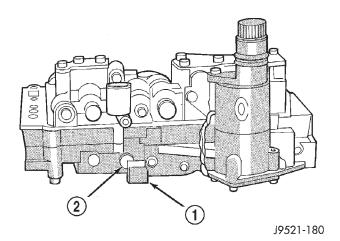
Seating 3-4 Accumulator On Lower Housing
